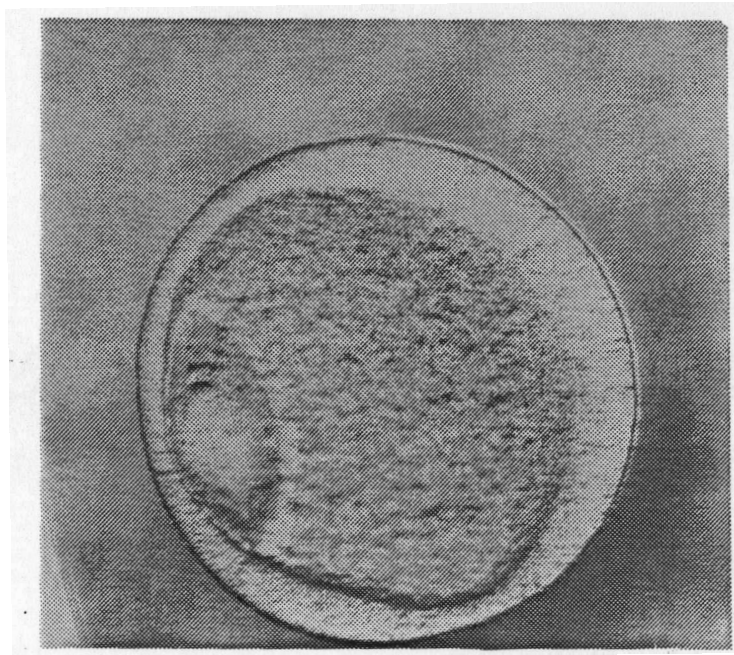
Fracture Surface of Sample No. 2. 36X.
